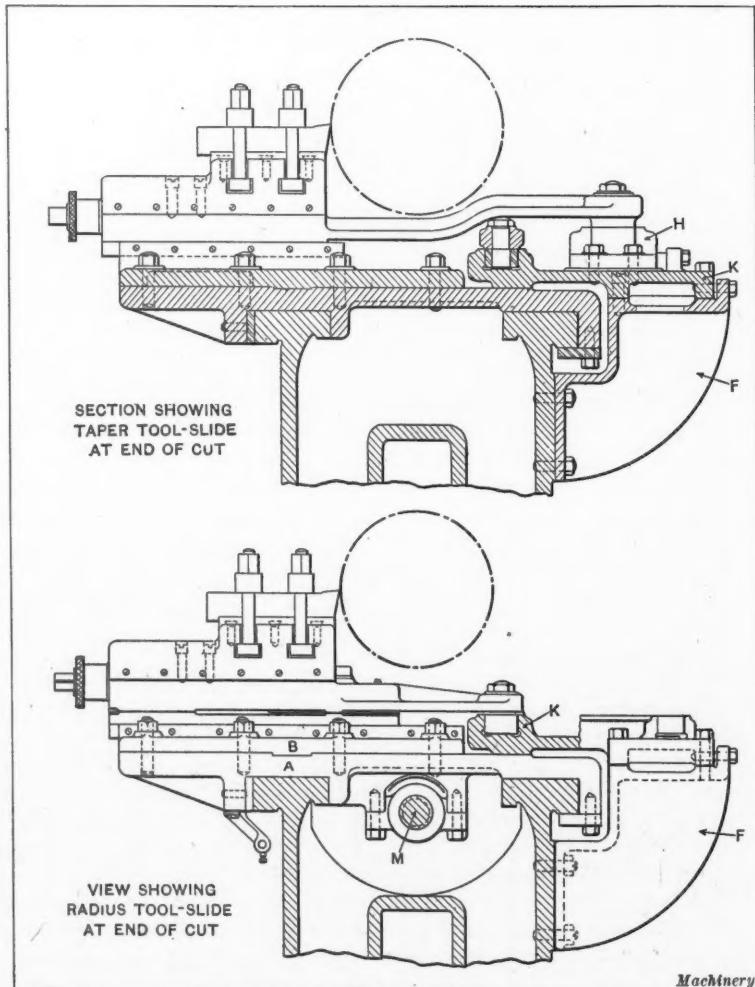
Sections through Bed, Carriage, and Tool-slides of Shell Turning Machine
